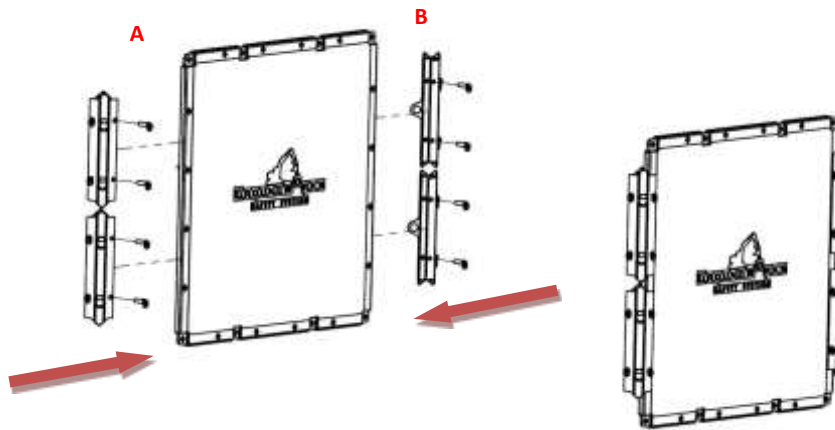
Pit Kit Step One – Corner Connectors on Both Sides of First Panel
